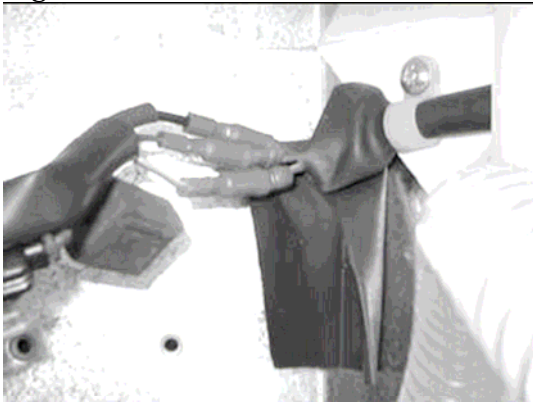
shows the bullet connectors leading from the handlebar to the wiring look located on the base plate. Note: the plastic shroud can be slid up the wiring from the handle by undoing the screw holding the 'P' clip (as seen) to expose the connectors.
